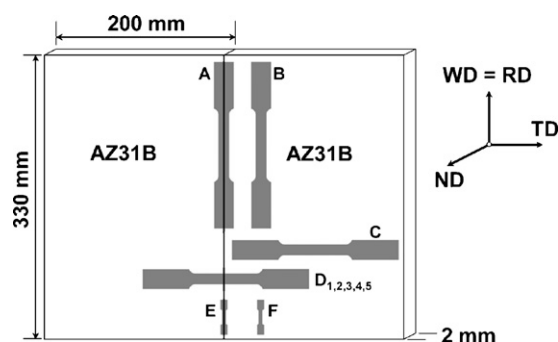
Schematic overview of the configuration of the AZ31B magnesium alloy plates joined by laser beam welding in but-joint without wire. The configuration of the machined tensile samples of the welded joint and the base material is shown. WD, welding direction; TD, transversal direction; ND, normal direction.
